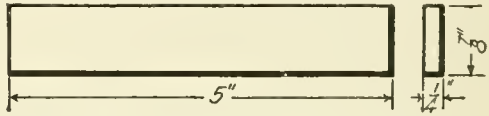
Dimensions of the upper and lower frame parts of the slide-carrier holder
